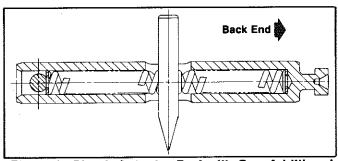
Clutch Actuator Rod with One Additional Shim Washer Added to Back End
